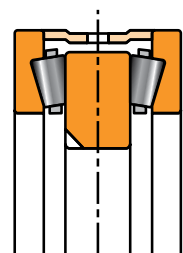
Typical TTDFLK assembly (with flat double inner raceways).
